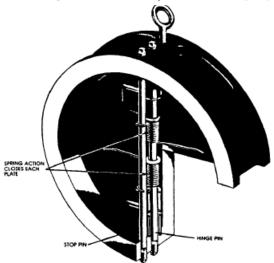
Wafer check valve. (Courtesy of TRW Mission Drilling Products Division.)
